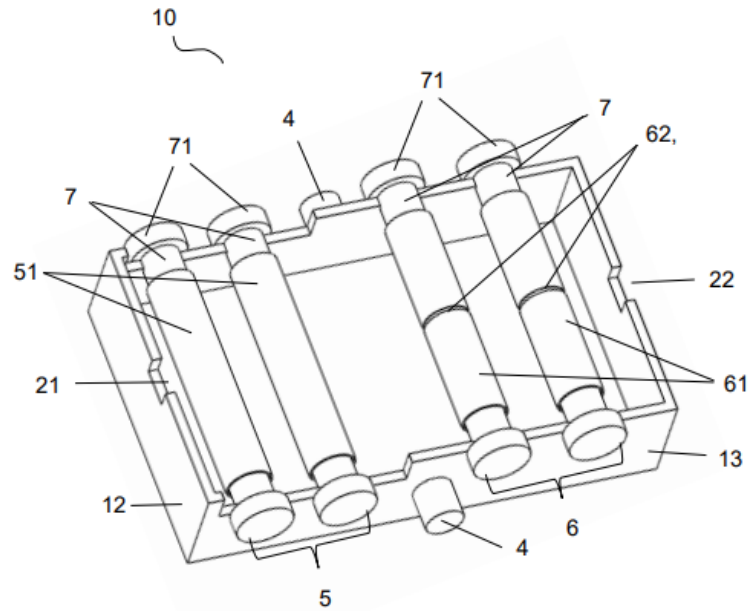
An exemplary axonometric view of the adhesive applying apparatus assembly.
